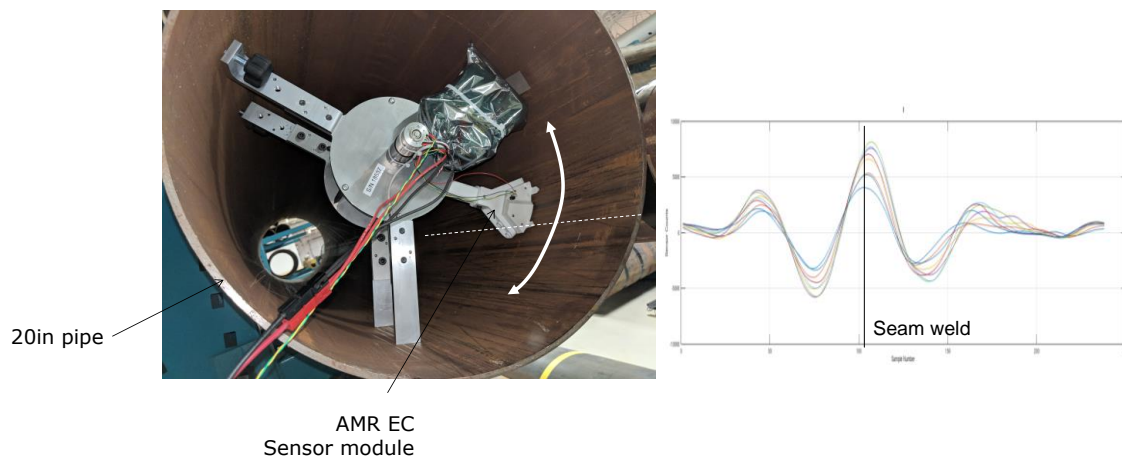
USING AMR EC MODULE FOR SEAM WELD DETECTION
